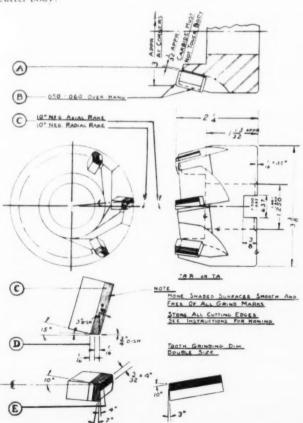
TYPICAL DELCO PRODUCTS CUTTER DESIGN STANDARD SHEET
